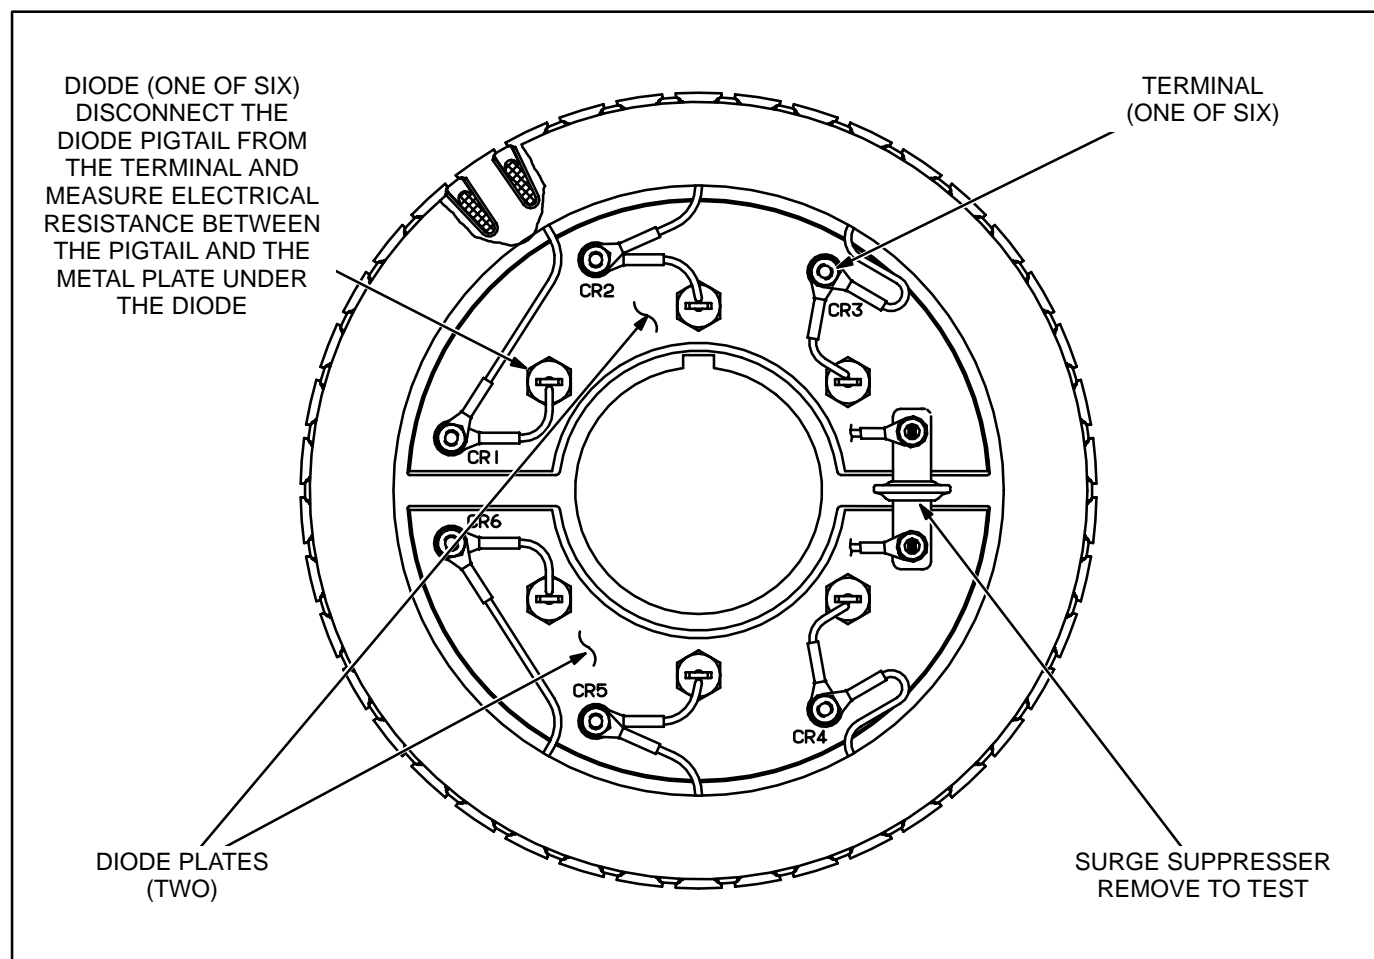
TESTING THE ROTATING RECTIFIER ASSEMBLY
